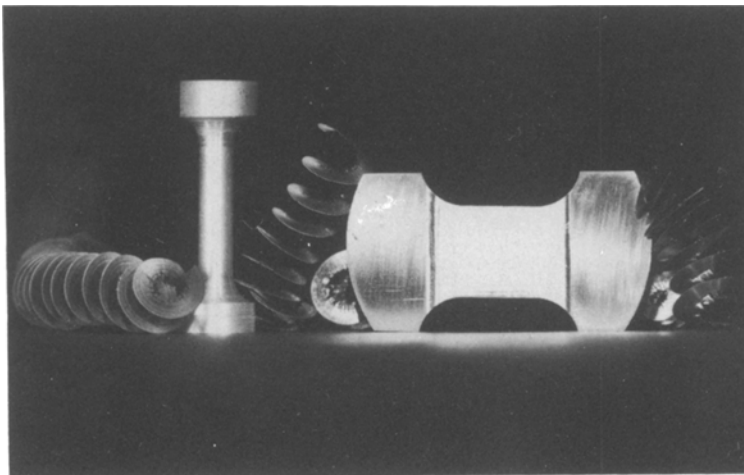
Tensile specimens machined from the as-compacted material. The specimens are 50 mm long. Note the continuous machining chips obtained.
